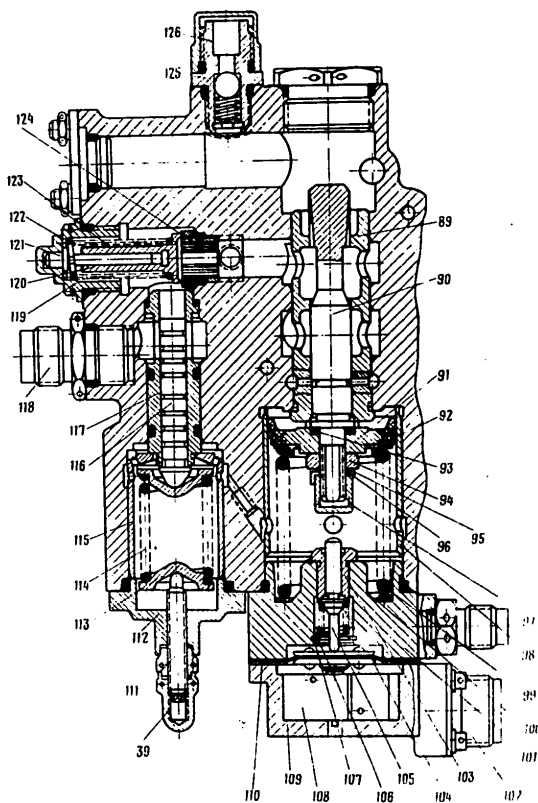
Afterburner Valve, Electric Switch, Fuel Valve and Cut-Off Valve Units
